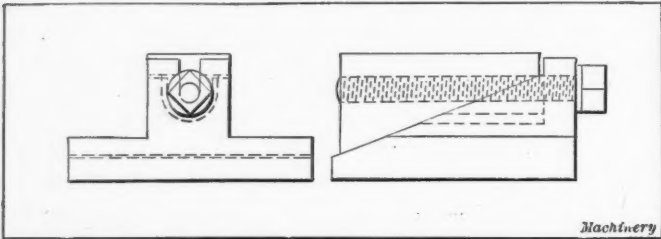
Leveling Block of the Type used in a Concrete Foundation
